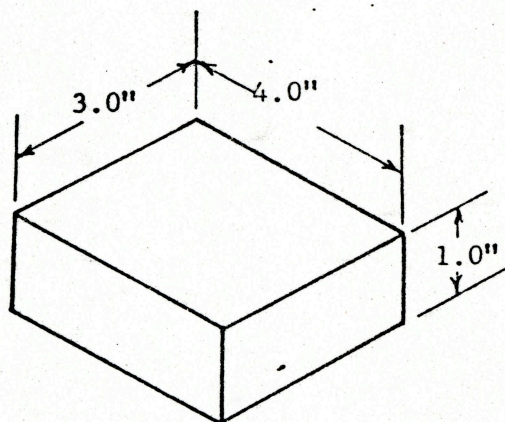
Preamplifier and Accelerometer Assembly - Stowed Dimensions (3 items)
